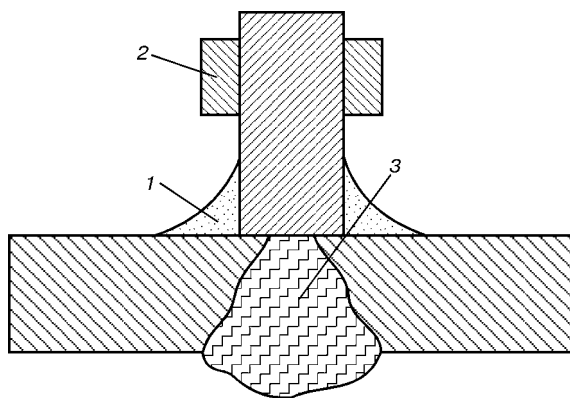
Schematic of the braze-welded T-joint: 1 – braze joint fillet; 2 – brazing filler alloy; 3 – weld
